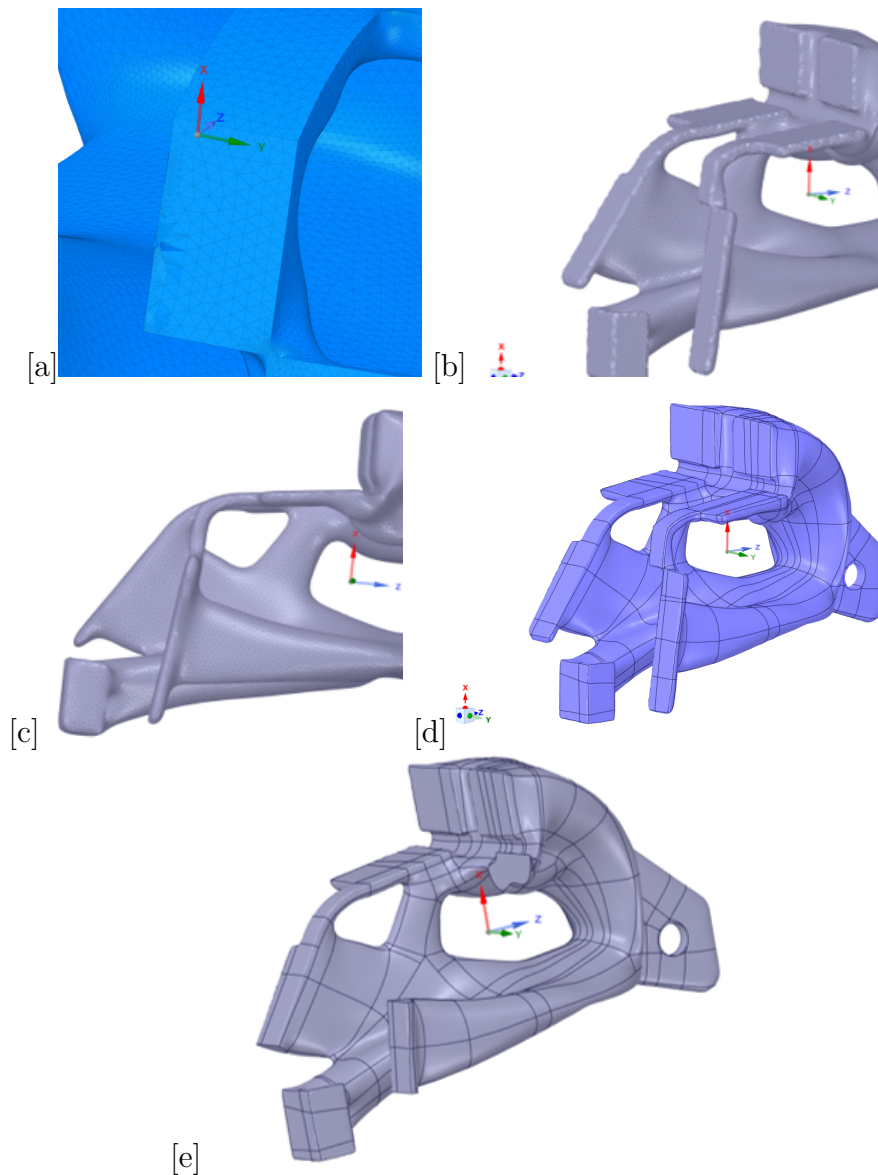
(a) Cutting of appendix (b) Shrinkwrapping (c) Smoothing Operations (d) Patch surface generation (e) Final result after excess area removal
